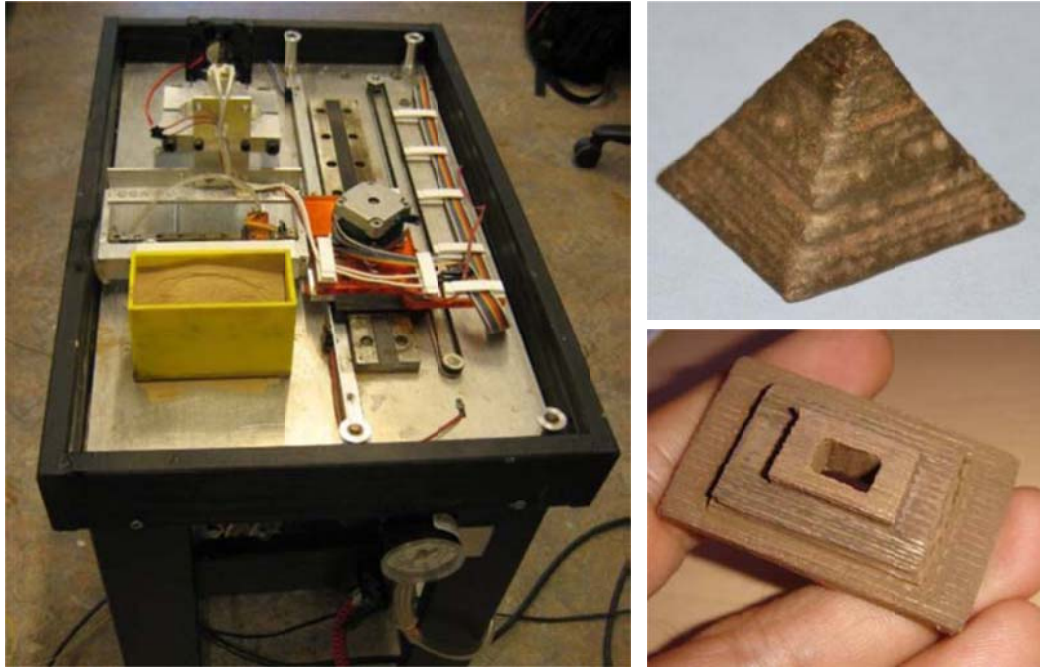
SIS-Metal alpha machine and some sample parts printed using it
